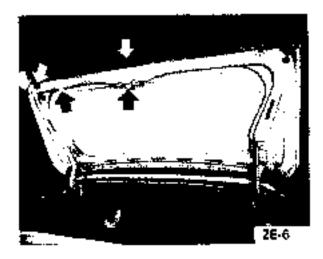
E-6 Rubber Bumpers Lamp and Lock Location
